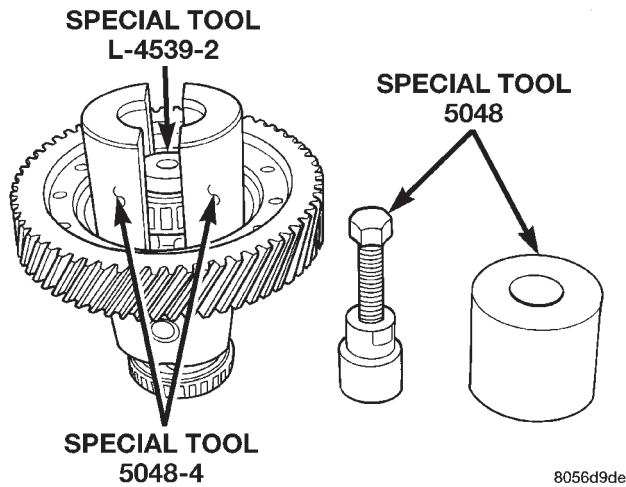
Position Button and Collets Onto Differential and Bearing (Ring Gear Side)
